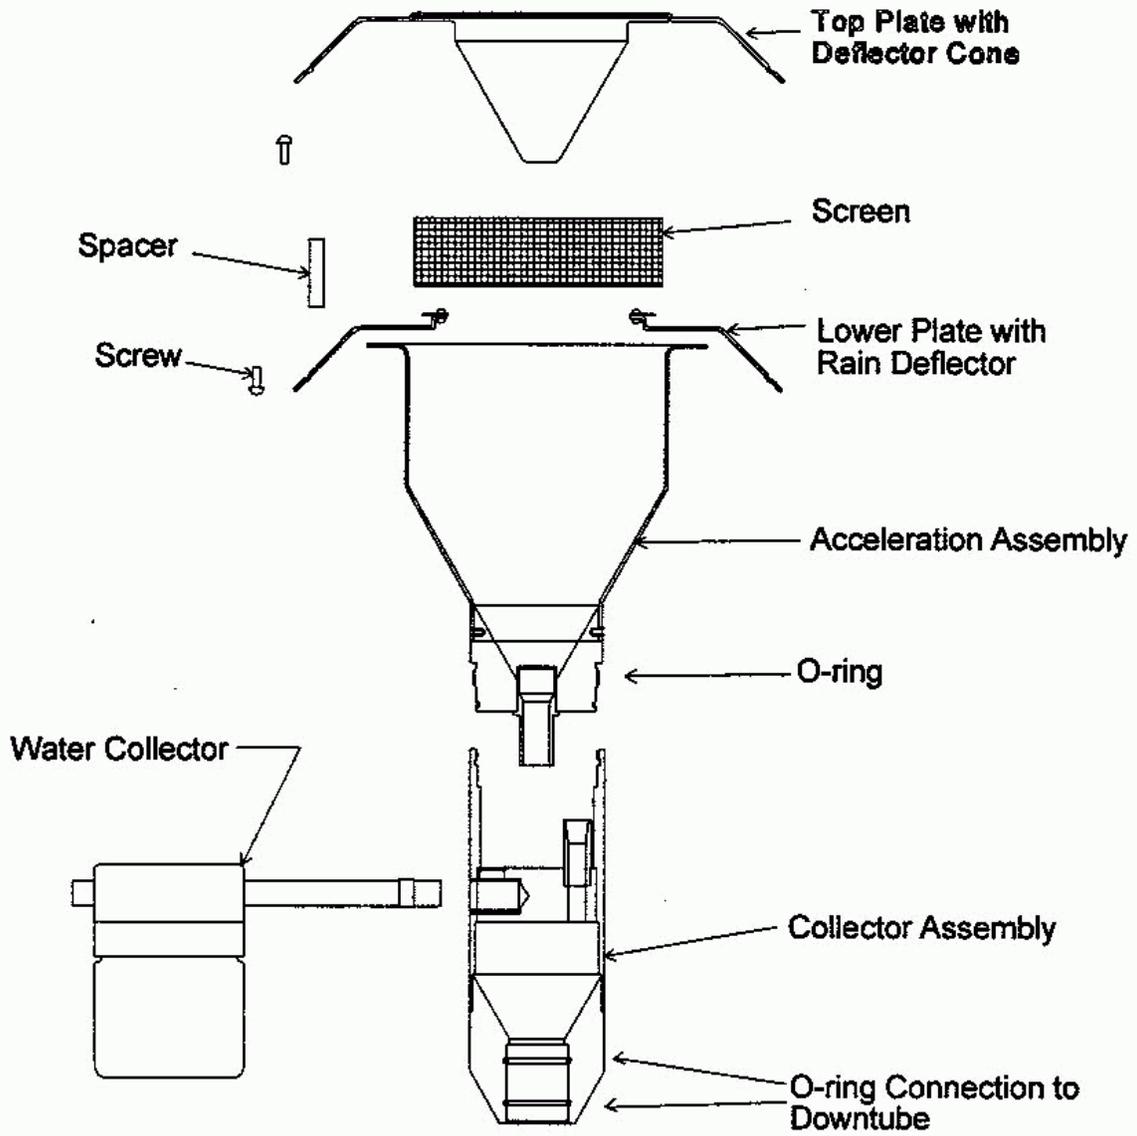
Exploded Cross-Sectional View of The PM<sub>2.5</sub> Sampler Inlet Head
